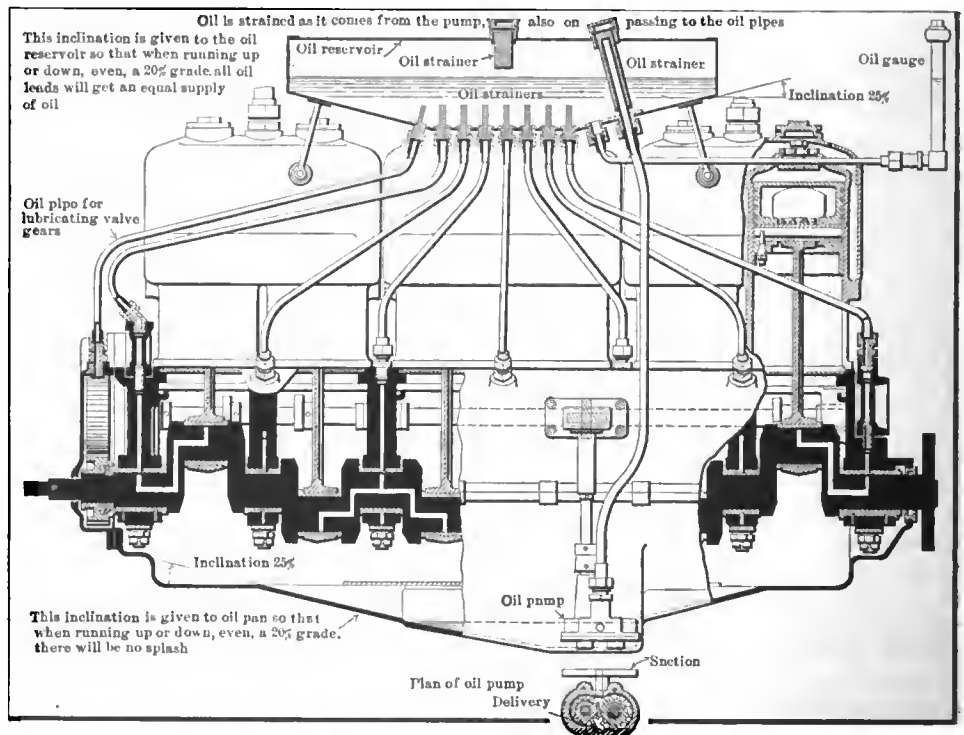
Complete engine lubricating system of Pierce-Arrow cars, showing drilled crankshaft
